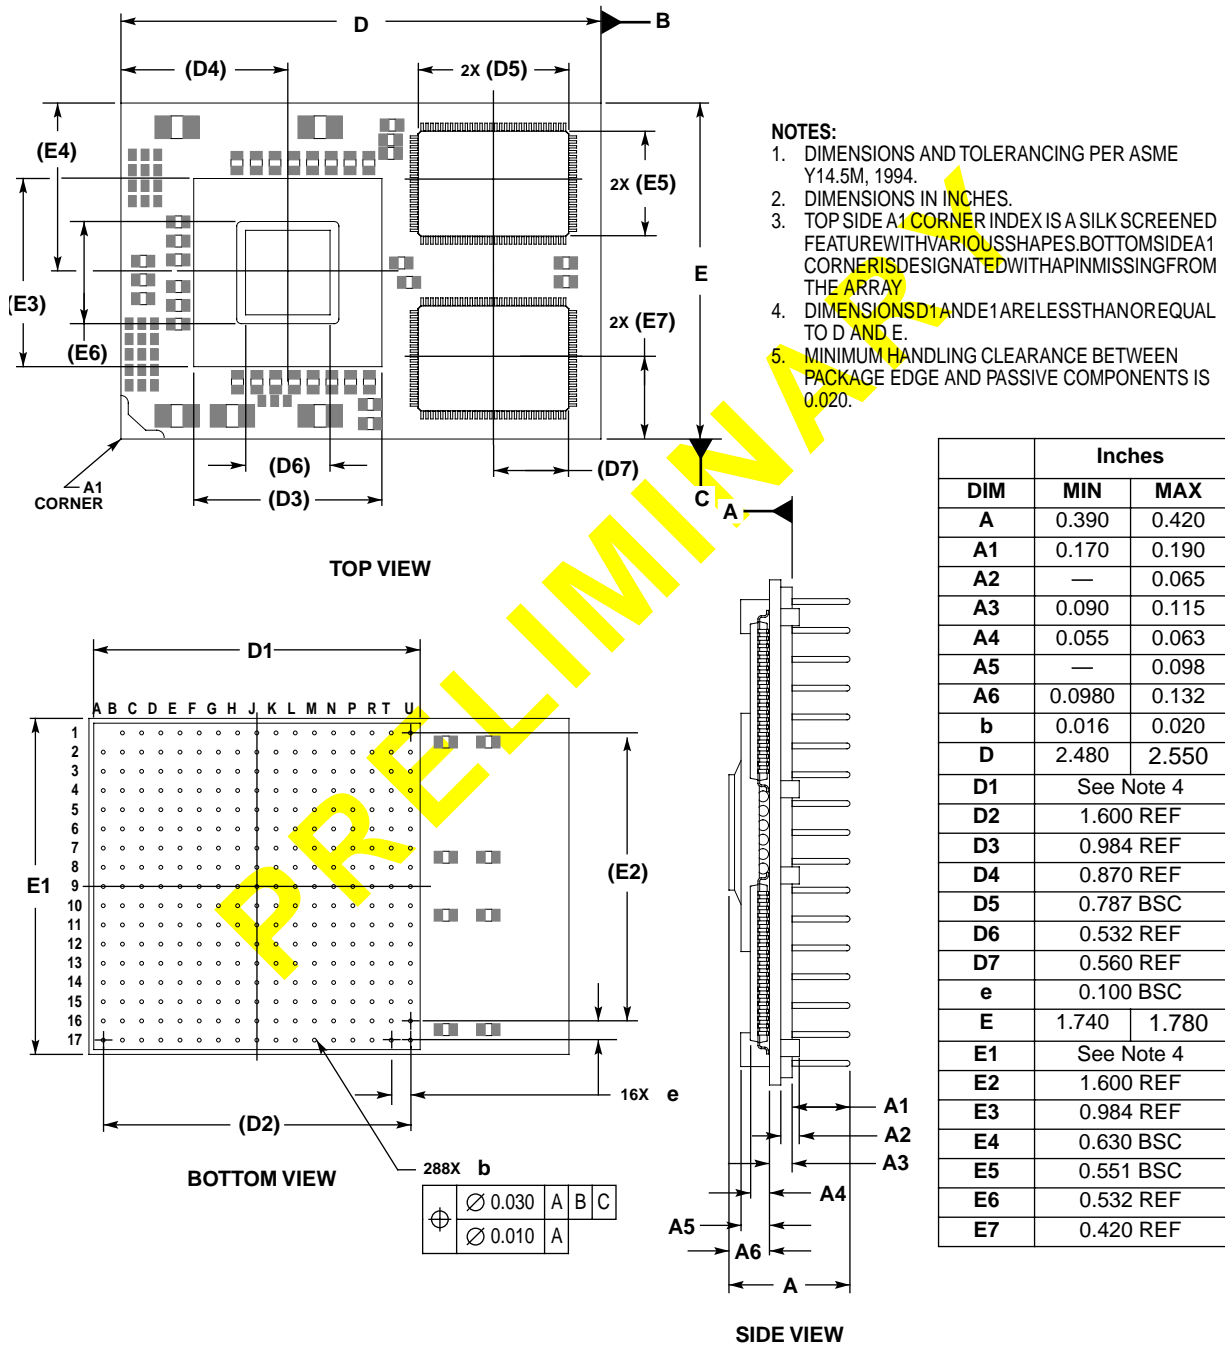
Mechanical Dimensions and Bottom Surface Nomenclature of the PCM
